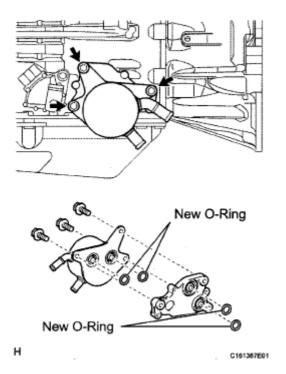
Identifying Automatic Transmission Assembly Bolts And O-Ring (W/O Trailer Towing System)
